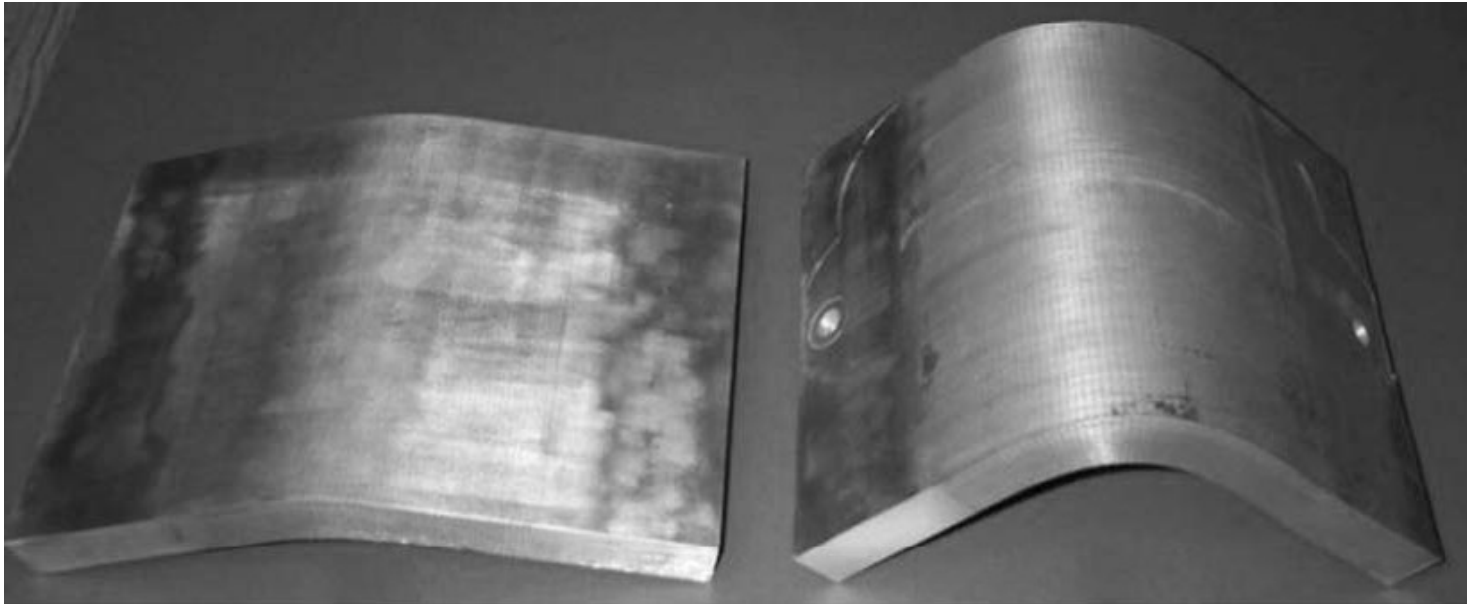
Plane-strain bending in 50 mm (2 in.) thick 6061-T6 Al. (a) Parent metal bent to 27° , with cracks initiating on the tensile surface. (b) Friction stir processed 6061-T6 Al bent to 85° without cracking. Circle grid analysis of the surface strains showed that the negative minor strain at the crown was less than 1%.
